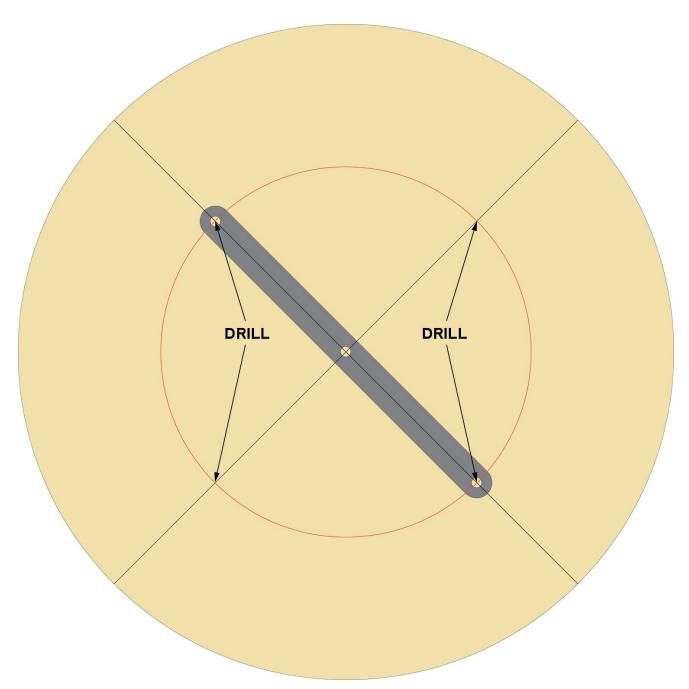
Mark and drill 4 holes for mounting the linkage
